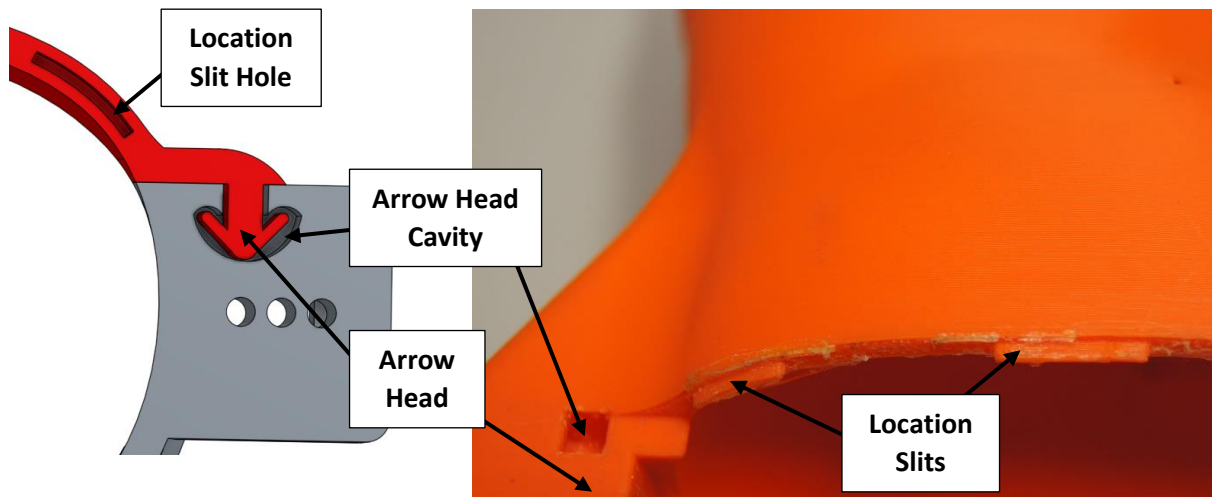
Ninjaflex Palm Edge Location Slits and Assembly Holes
